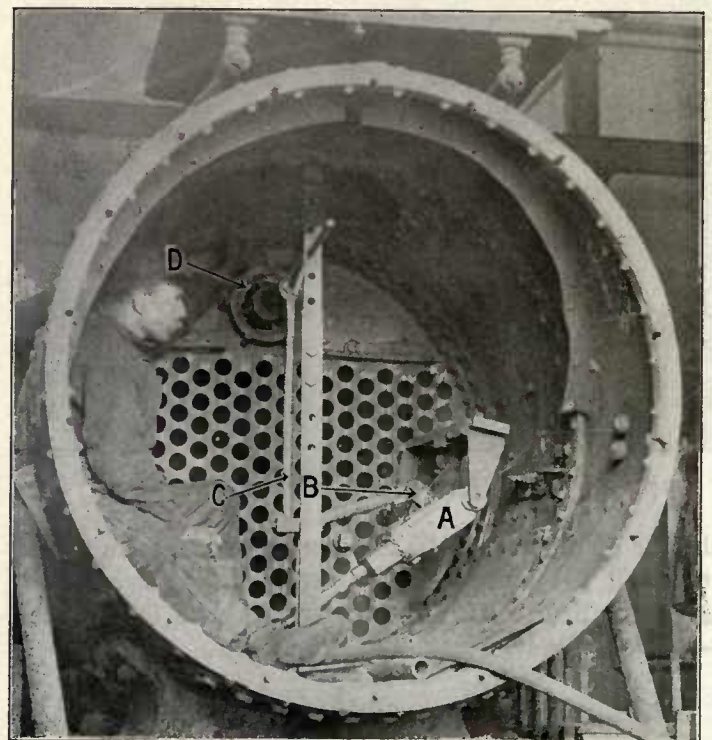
Grinding Dry Pipe Joint in Tube Sheet.
